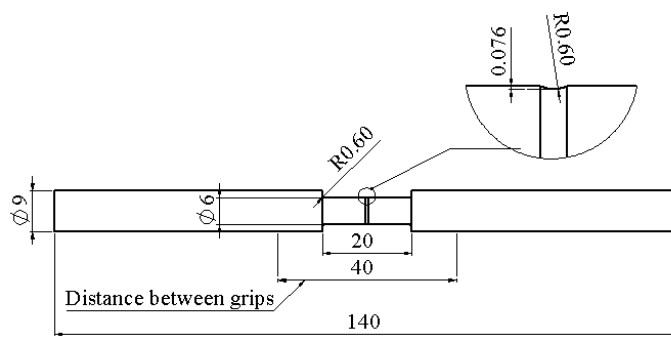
Geometry and dimensions of specimens used for the RR tests.
